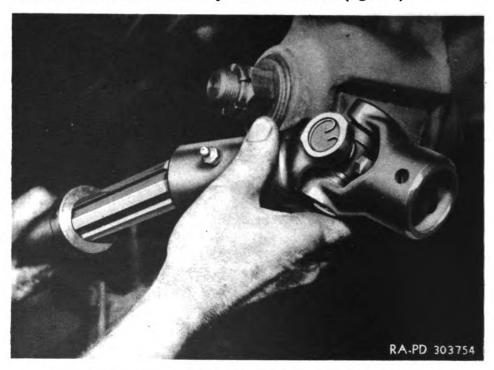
Installing Slip Joint on Winch Propeller Shaft
